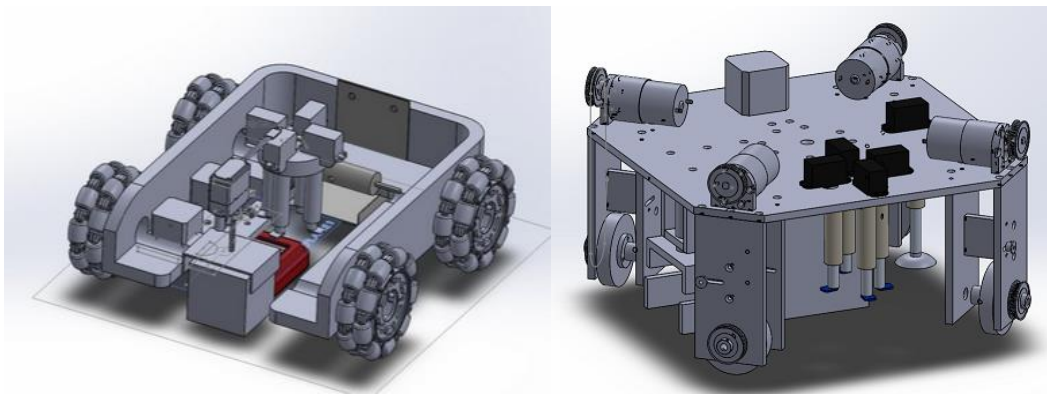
U Shaped Chassis vs. Overhead Plate Chassis
